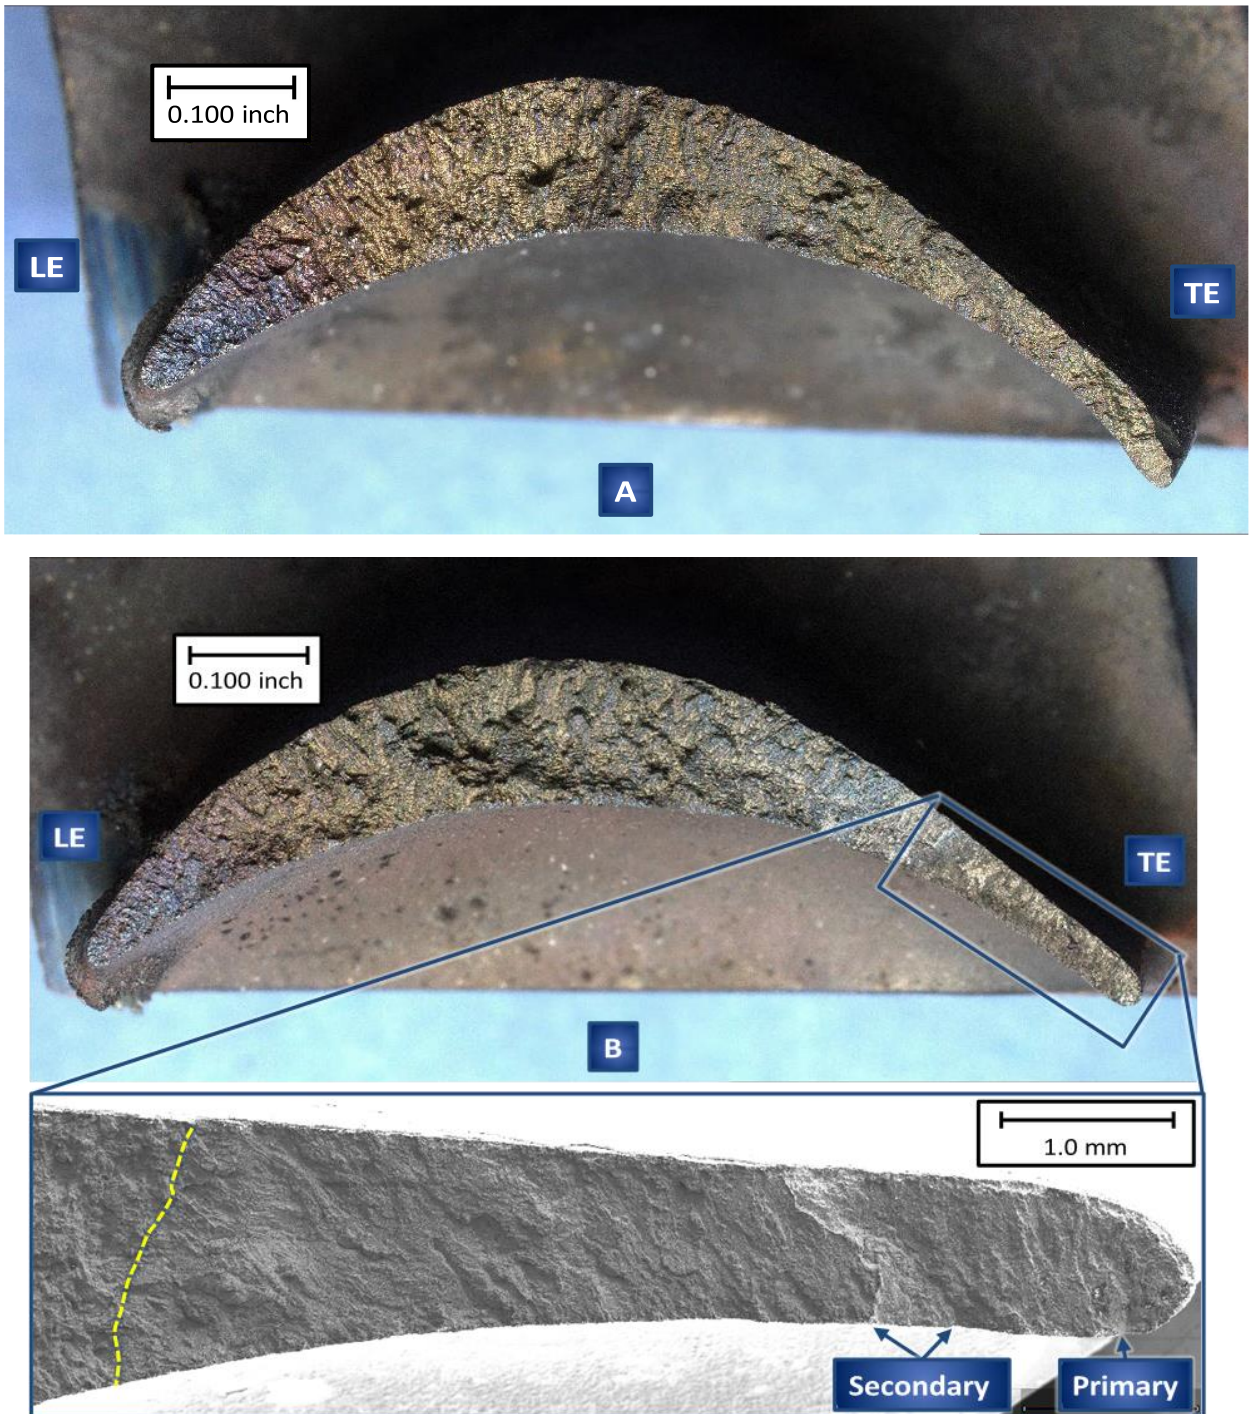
Power turbine blade fracture surfaces (top and center images) and blade trailing edge showing fatigue origin areas (bottom image).
